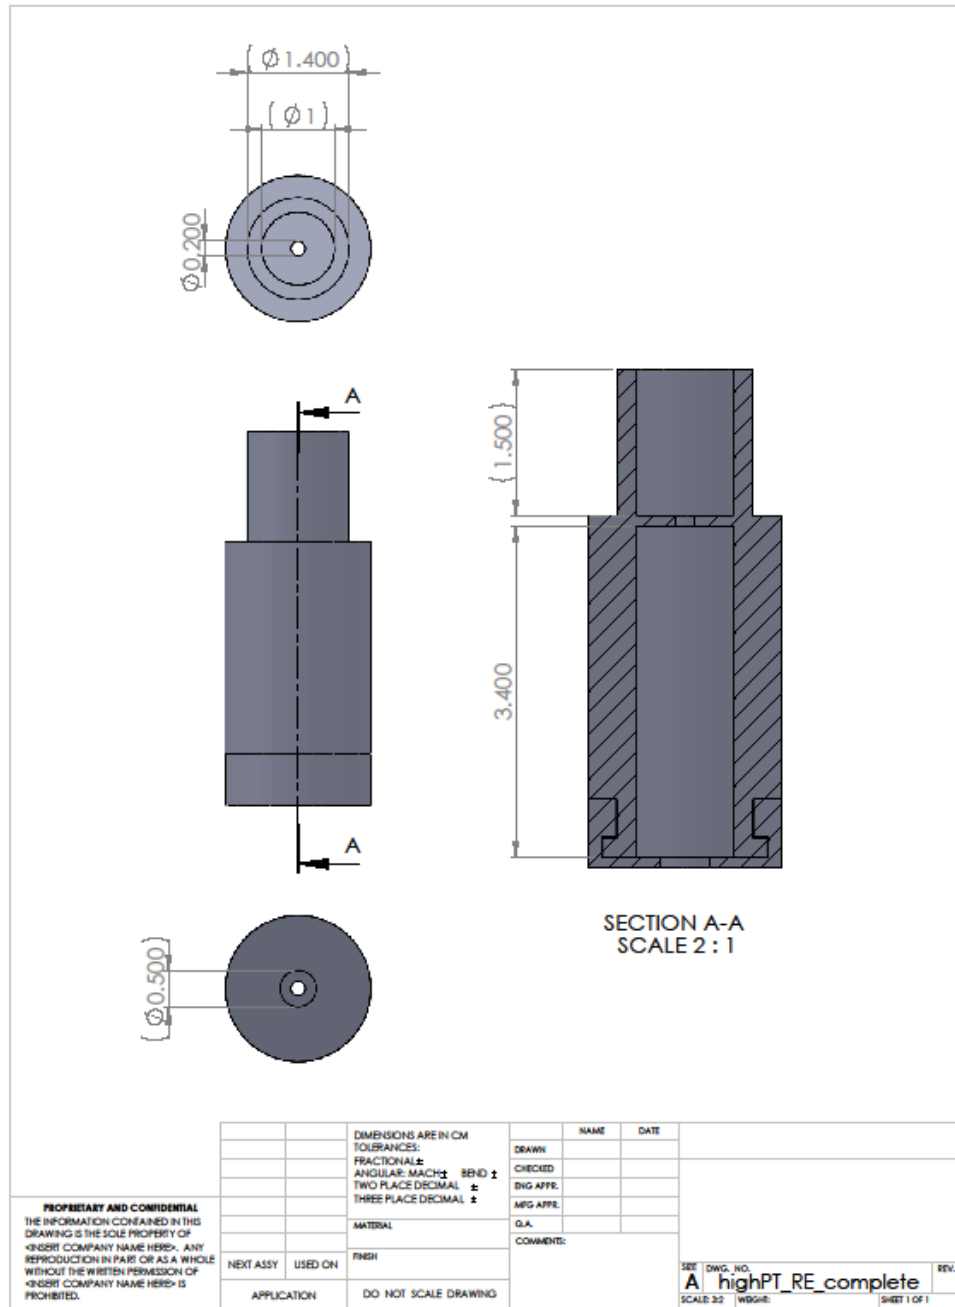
Front, top and bottom view of the order-500-Re point source displaying dimensions and a section view of important features.
